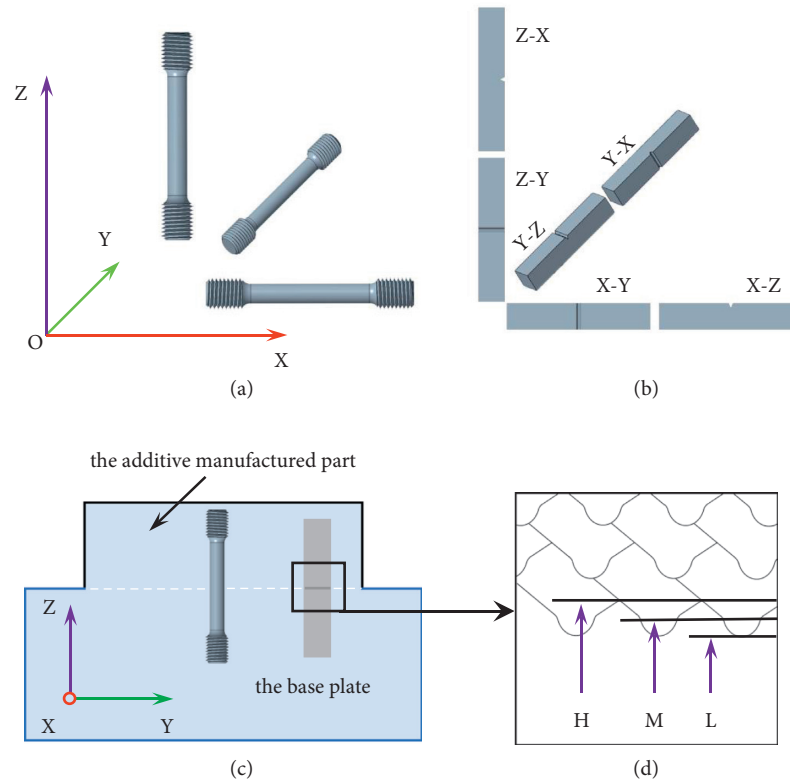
Schematic illustrations of sampling locations. (a) Tensile tests, (b) impact test sampling of the AM part, (c) tensile and impact test sampling locations, and (d) V notch locations of impact test samples of the HAM part.
